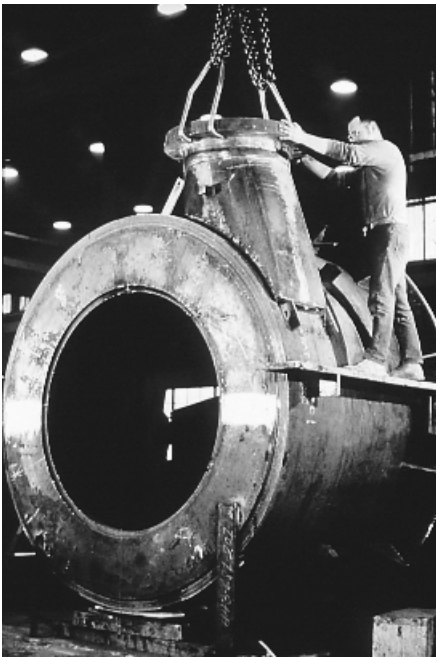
Nozzle positioning and welding. (*Dresser-Rand Company, Olean, N.Y.*)
